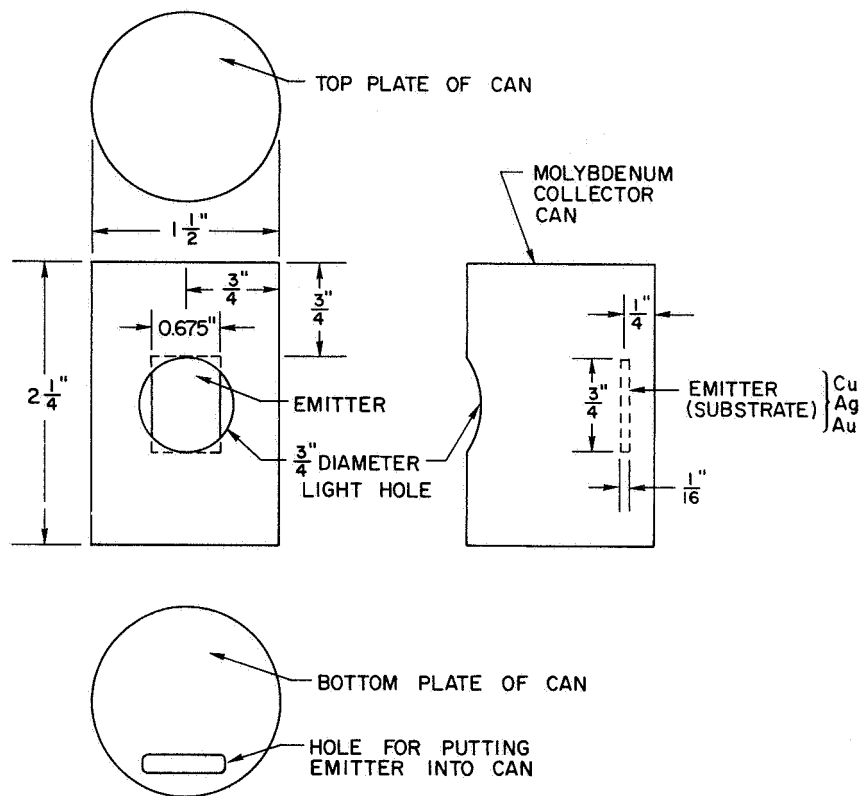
GEOMETRY AND DIMENSIONS OF COLLECTOR AND EMITTER OF THE PHOTODIODE.
